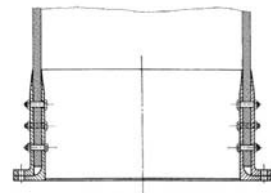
Heavy dual steel flange in earlier rotor blades (LM)
